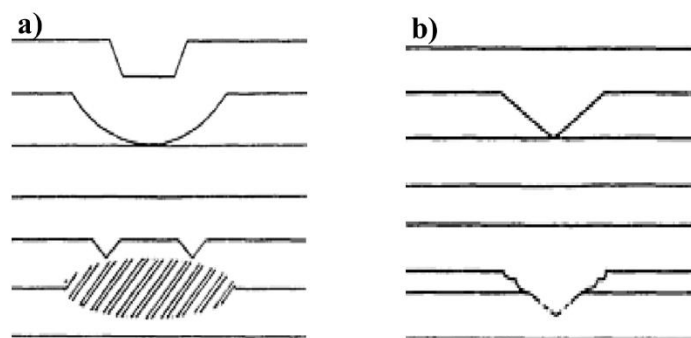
Representation of typical stacked configuration for: a) embossed-projection welding; and b) solid-projection welding (Committee and Metals 1982).
